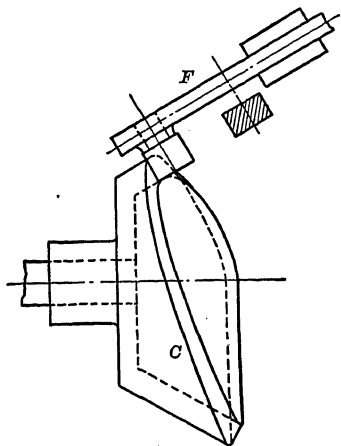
CONICAL CAM AND RECIPROCATING FOLLOWER
